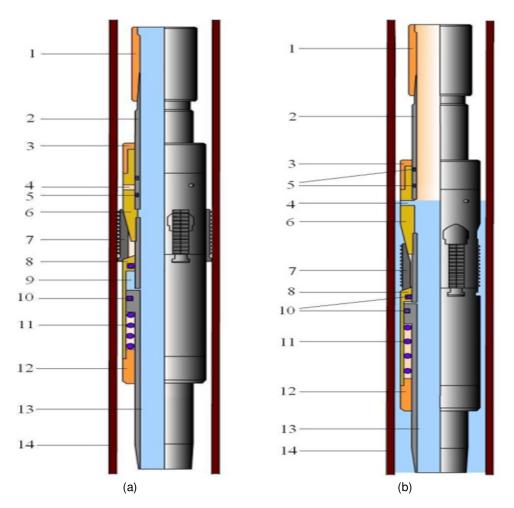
Schematic of a hydraulic anchor. at (a) Anchoring status and (b) Releasing status, 1-Upper joint; 2-Oil drainage nipple; 3-Upper protection cap; 4-Drain hole; 5-Seal ring; 6-Taper; 7-Slips; 8-Piston; 9-Hydraulic cavity; 10-Seal ring; 11-Spring; 12-Lower protection cap; 13-Centre tube; 14-Casing.
